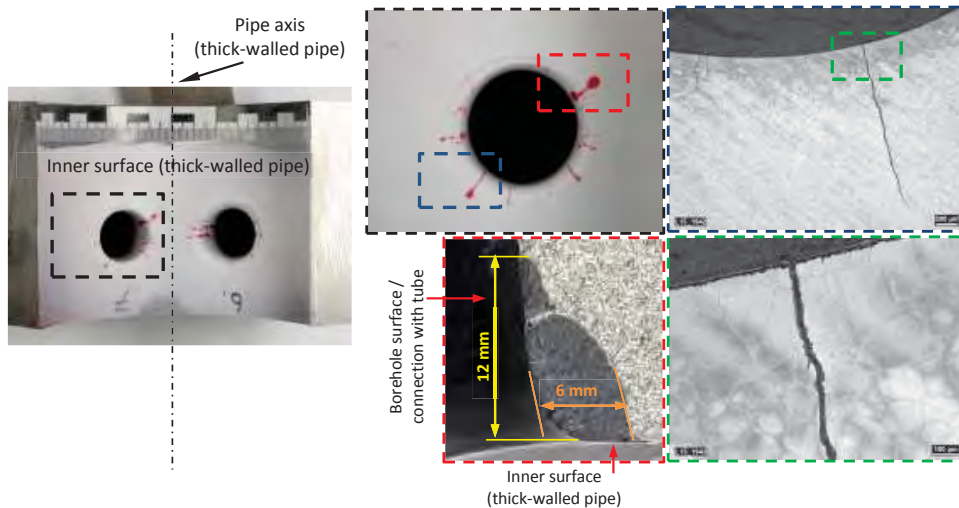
Investigations at the bore hole with 3 mm radius, material: Alloy C263
